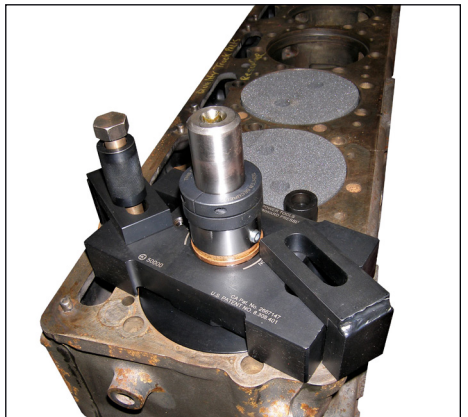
Insert Bolt Standoffs/Washers and Head Bolts
